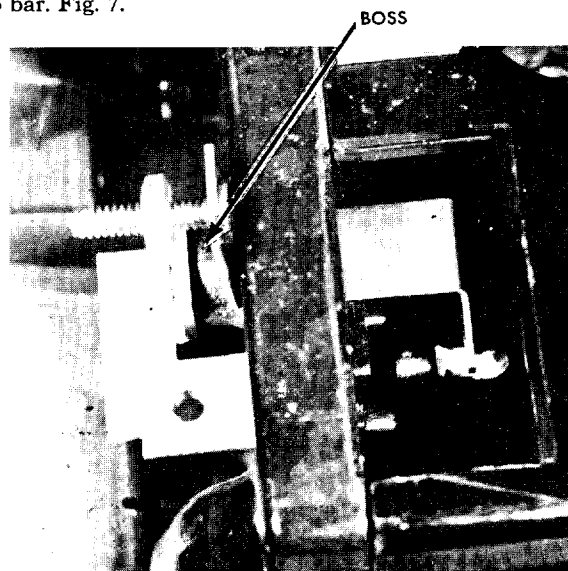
Assembly of Mounting Bracket and Tripping Hook
